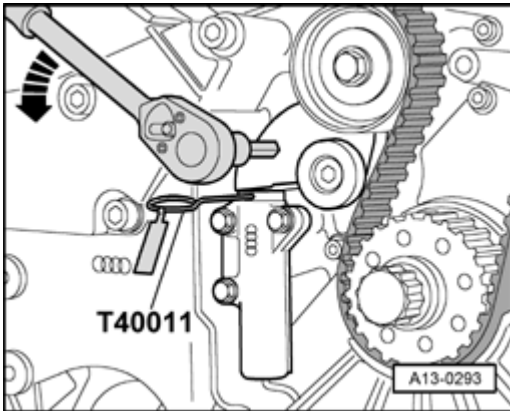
Turning Tensioning Lever Using Hex Socket Wrench Until Locking Pin T40011 Can Be Pulled Out
